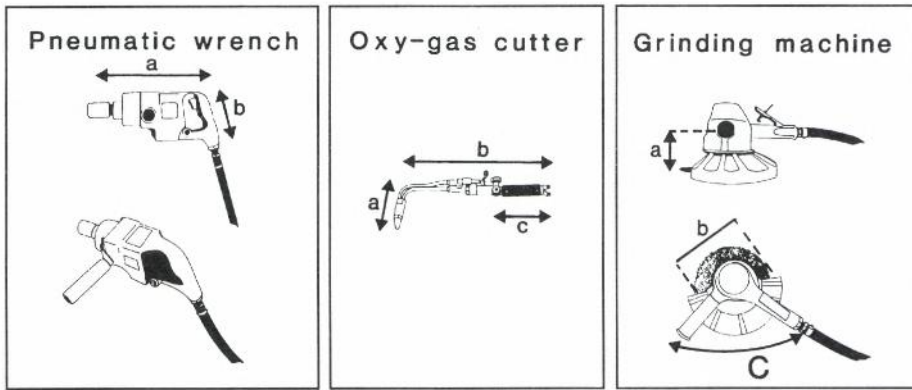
The pneumatic wrench, oxy-gas cutter, and grinding machine that were used in the experiments. Dimensions are presented in Table 2.
